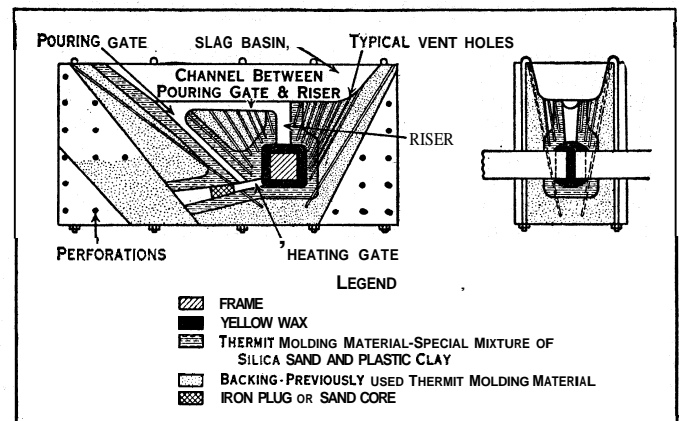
METHOD OF CONSTRUCTING MOLDS FOR MAKING THERMIT WELDS
